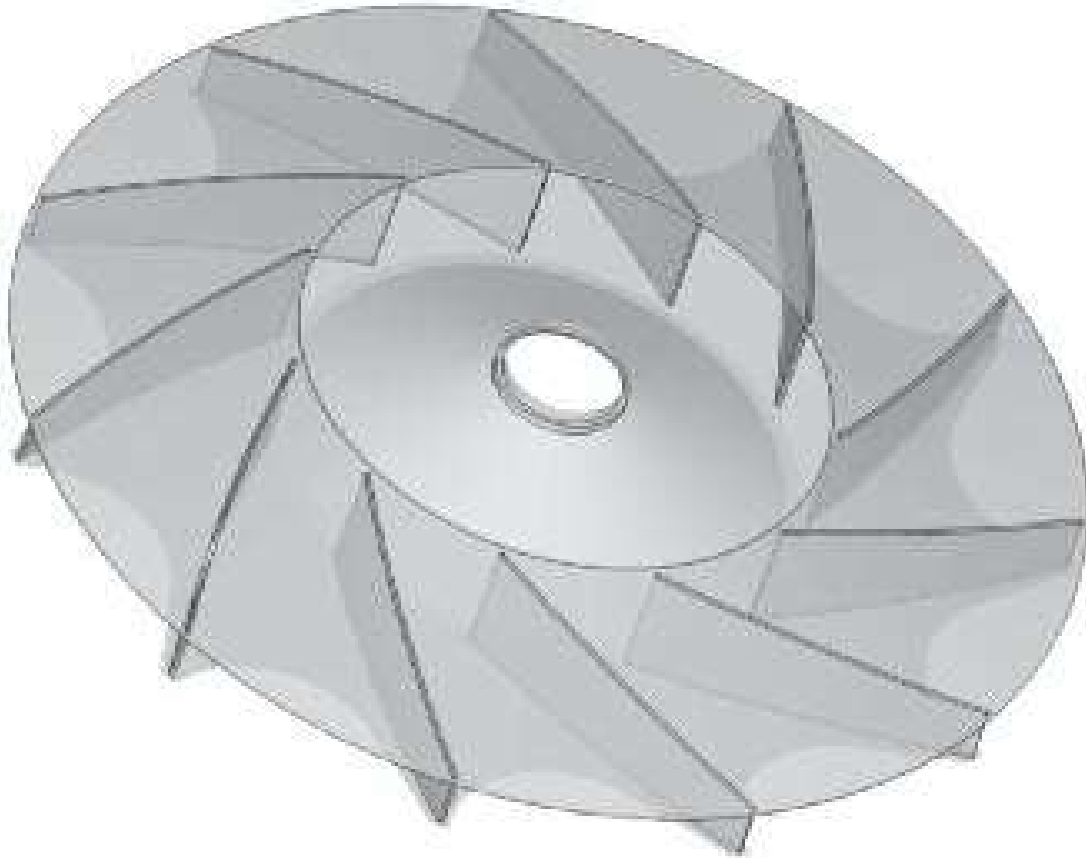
The studied fan centrifugal impeller with backward-swept cambered plate blades.
